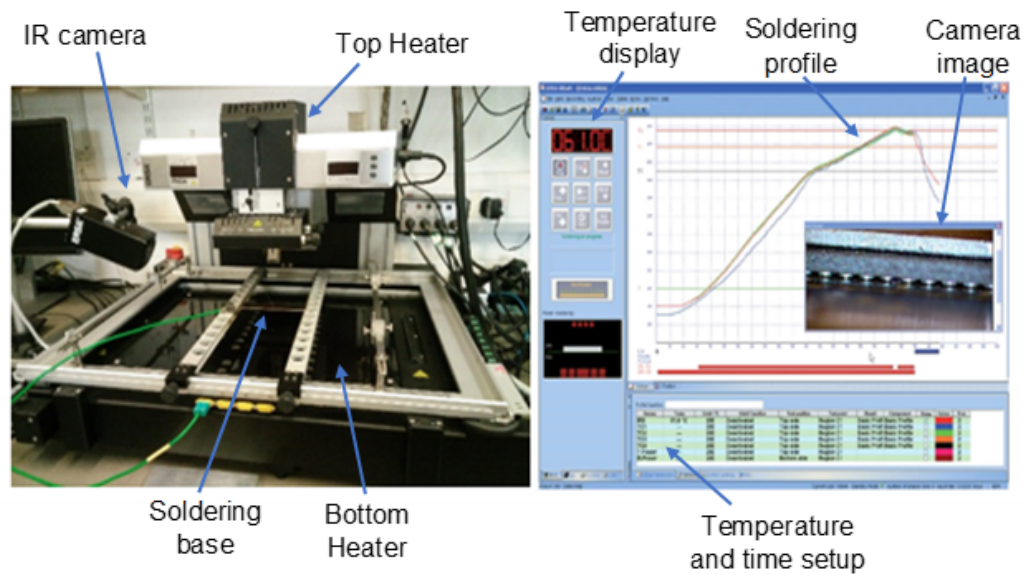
IR 650A Assembly equipment(left), soldering profile of sensor and interposer ACF assembly (right)
